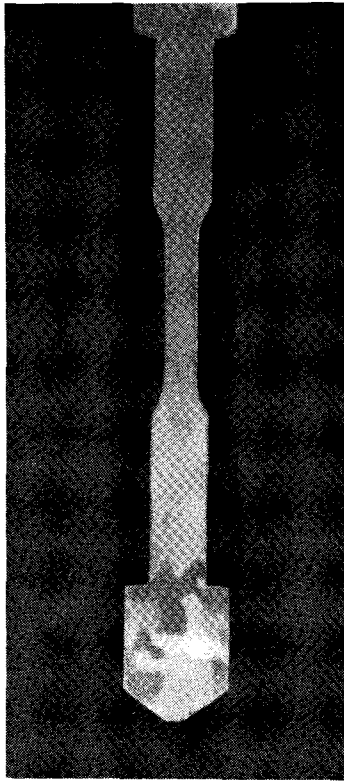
Macroetched (5 % HF) section of an aluminium-6 % magnesium specimen. It is clearly seen that the reduction in diameter causes a single crystal to grow from the larger polycrystalline section of the specimen.
